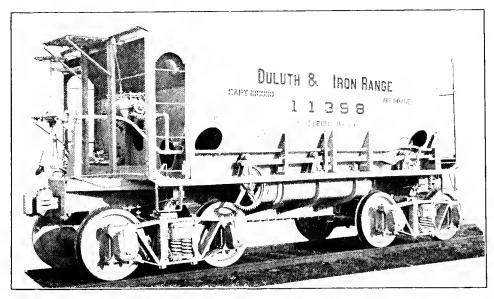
All-Steel 50-Ton Capacity Ore Car. Weight, 32,600 lbs.; Inside Length, 17 ft. 1 in.; Inside Width, 8 ft. 6 in. Capacity Level Full, Cubic Feet, 650. Builder, Pressed Steel Car Co.
